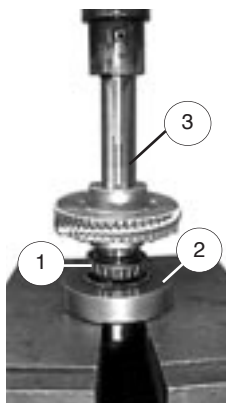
Reassembly of Worm Gear and Bearing Cone
